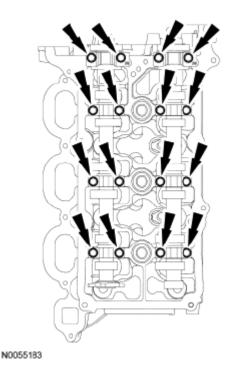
Identifying RH Camshafts Neutral Position Courtesy of FORD MOTOR CO.
